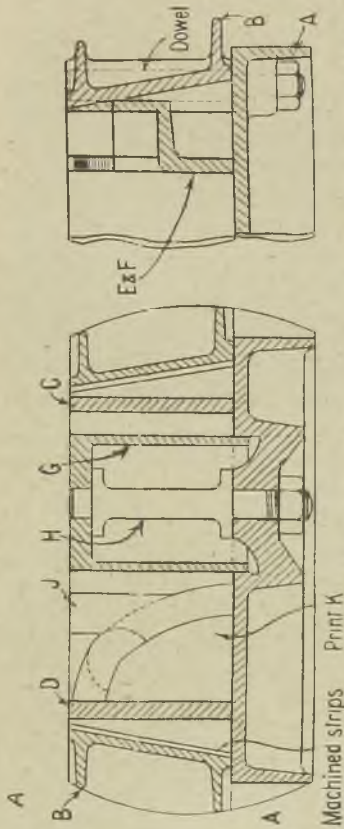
THE MAIN JACKET CORE-BOX, DESIGNED FOR QUICK AND ACCURATE PRODUCTION.
